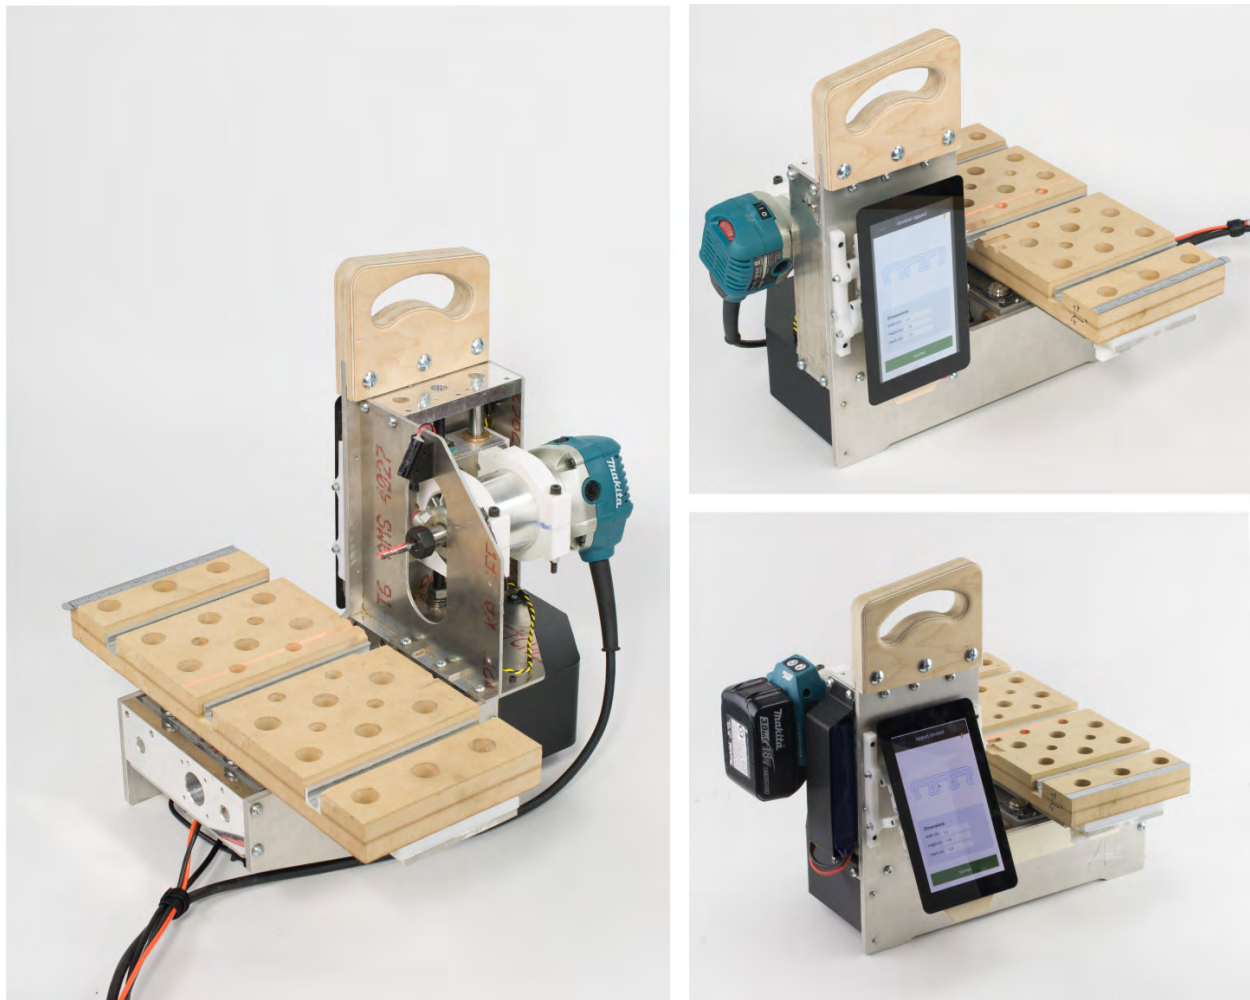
Our tool consists of a 3-axis CNC machine, trim router, touch screen for user interaction, line laser for quickly and accurately aligning cuts, and a modular build bed that accepts a variety of fixtures and alignment pins. During wireless operation, the motors run from a LiPo battery and a battery powered trim router is used.
